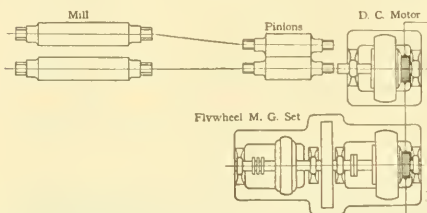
TYPICAL DRIVE FOR TWO HIGH REVERSING PLATE MILL
